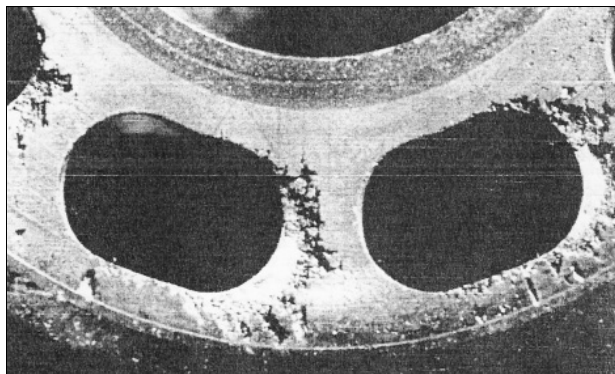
Damages of the outer parts of cylinder block cylinder outlets [Kunze and Brunner 1996]
